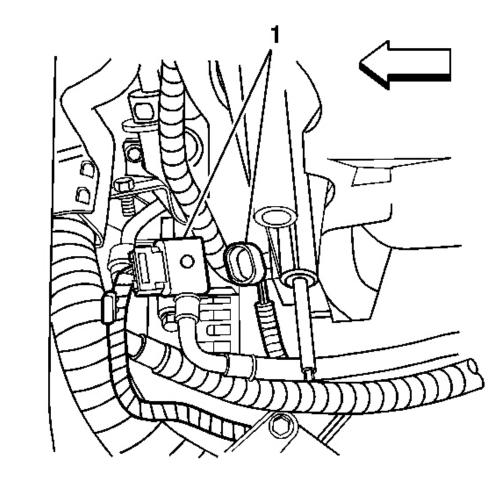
View Of Engine Coolant Temperature Electrical Connector Courtesy of GENERAL MOTORS CORP.
